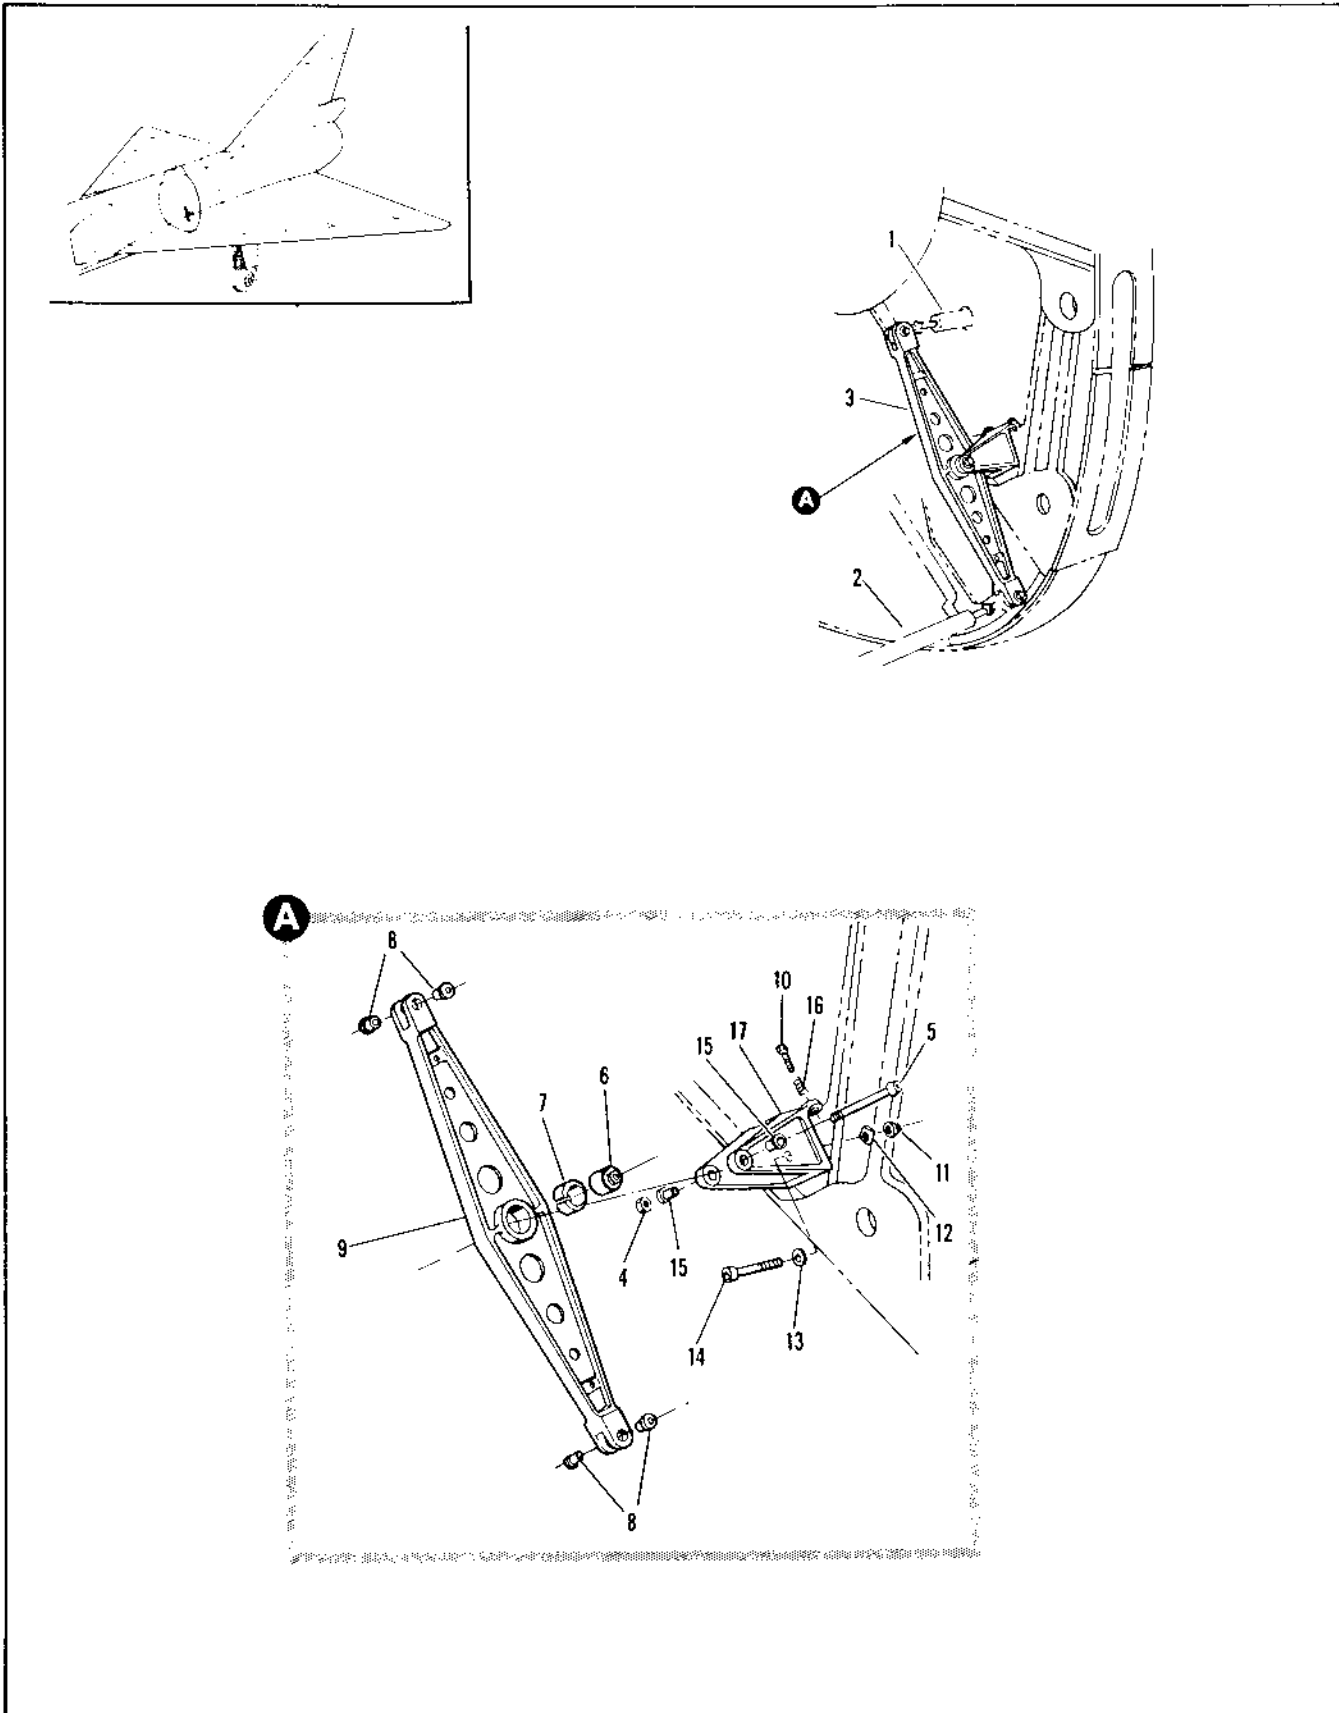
Elevator LH Bell Crank Installation Sta 426
